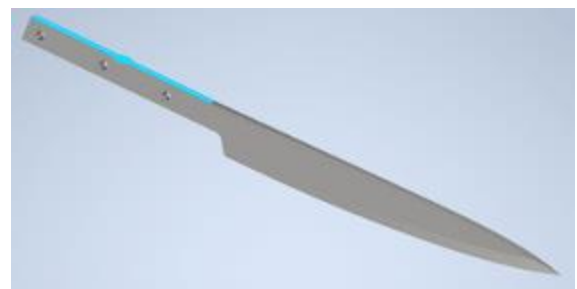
Fixed Constraint-the knife handle, a rigid part
